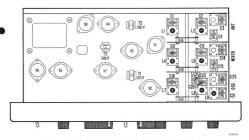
Bottom View of Chassis Showing Tube Locations and Alignment Adjustments
